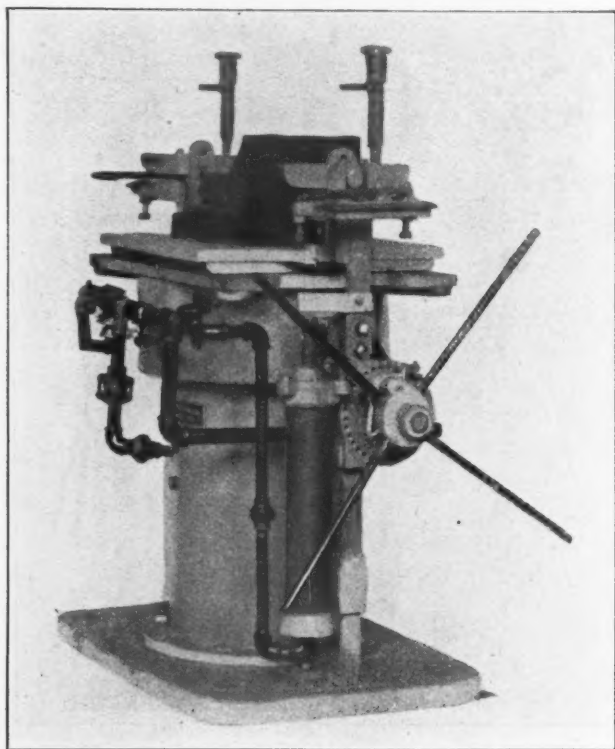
SIDE VIEW OF MOLDING MACHINE.
